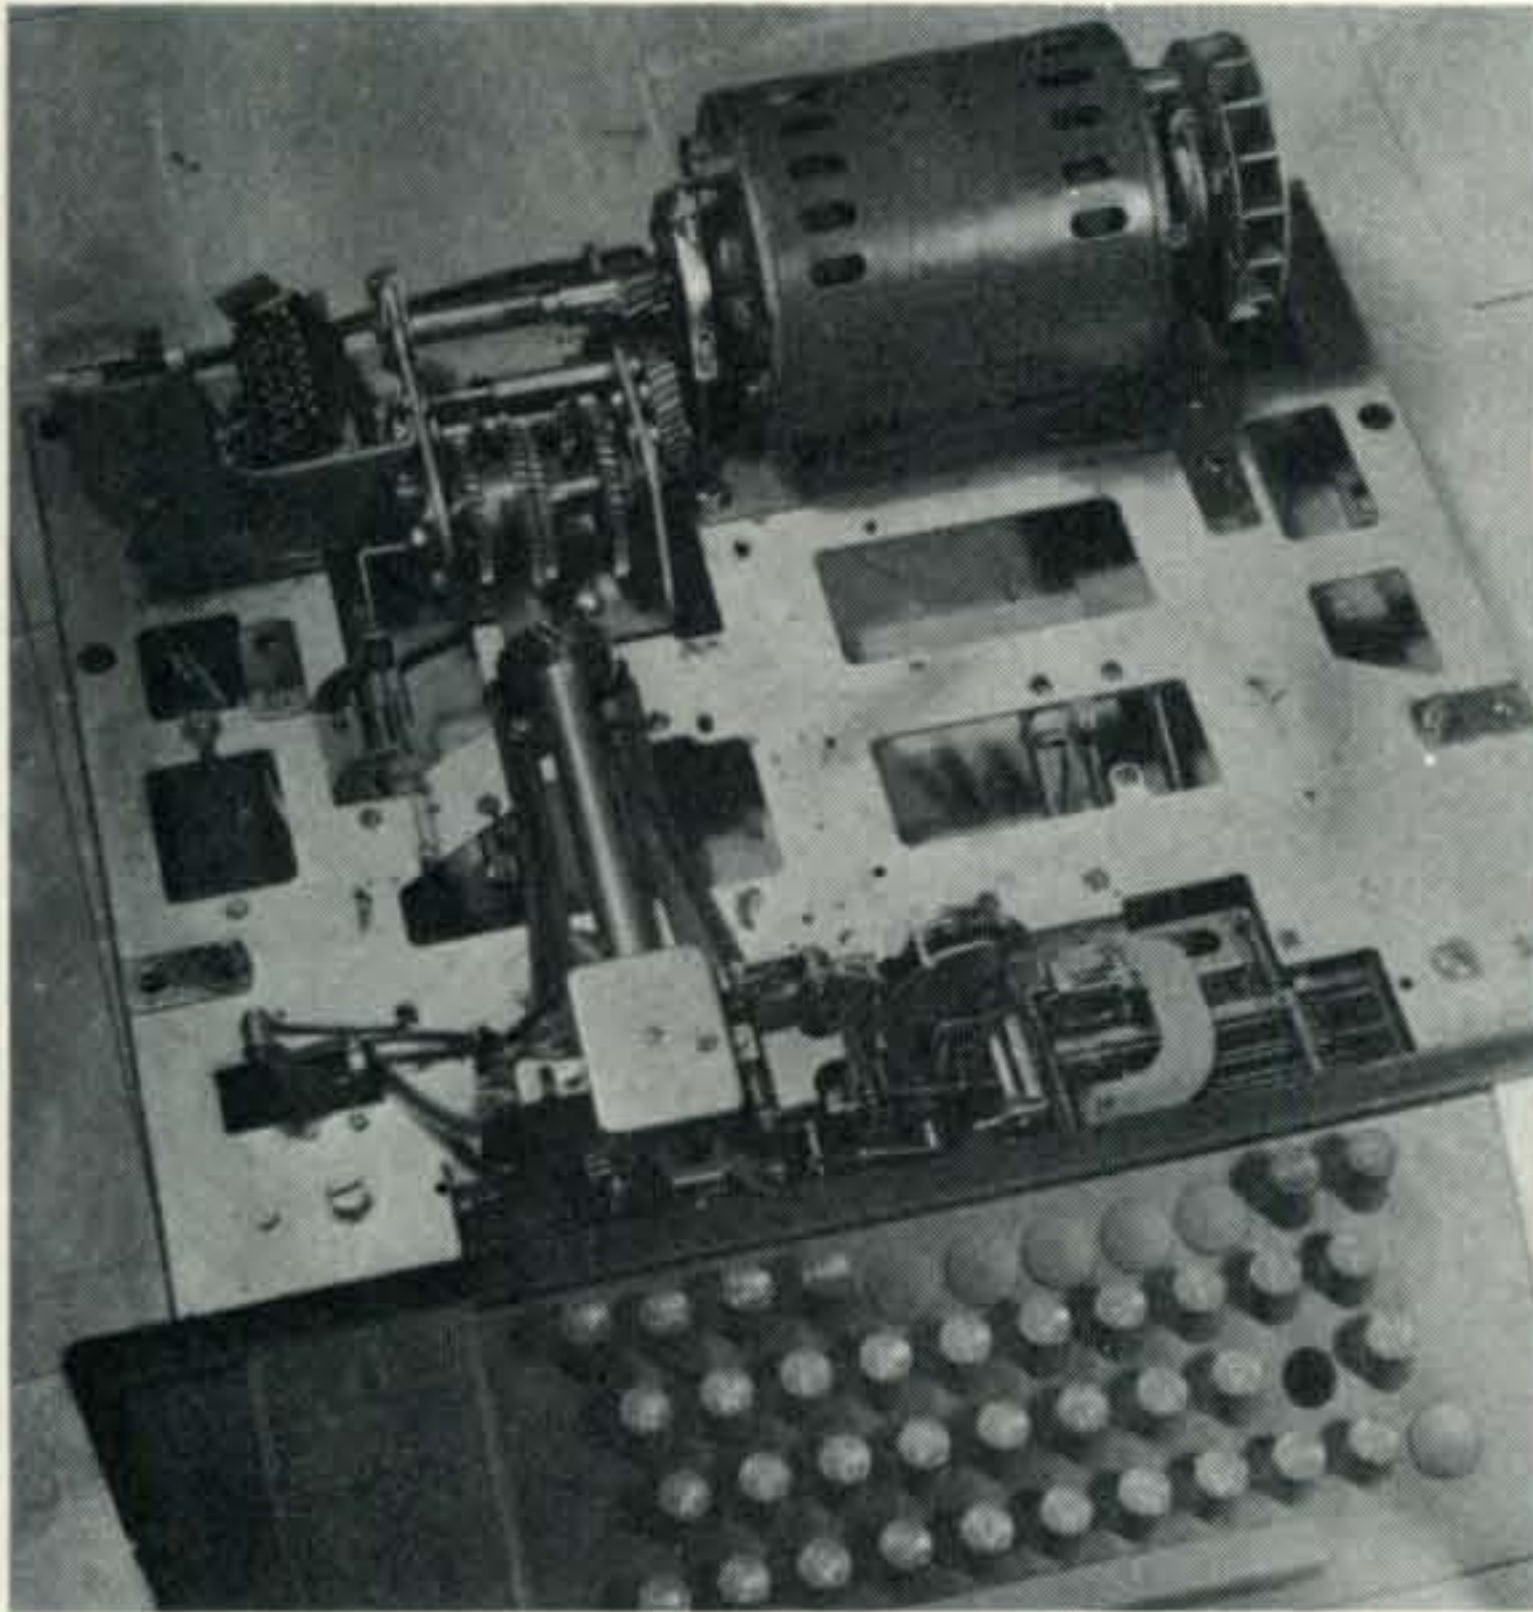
Mechanical 60-75-100 w.p.m. shift for the Model 28 KSR Teletype set. This is the only KSR shift available, although other more expensive shifts can be adapted to the KSR for 60-67-100 w.p.m.
